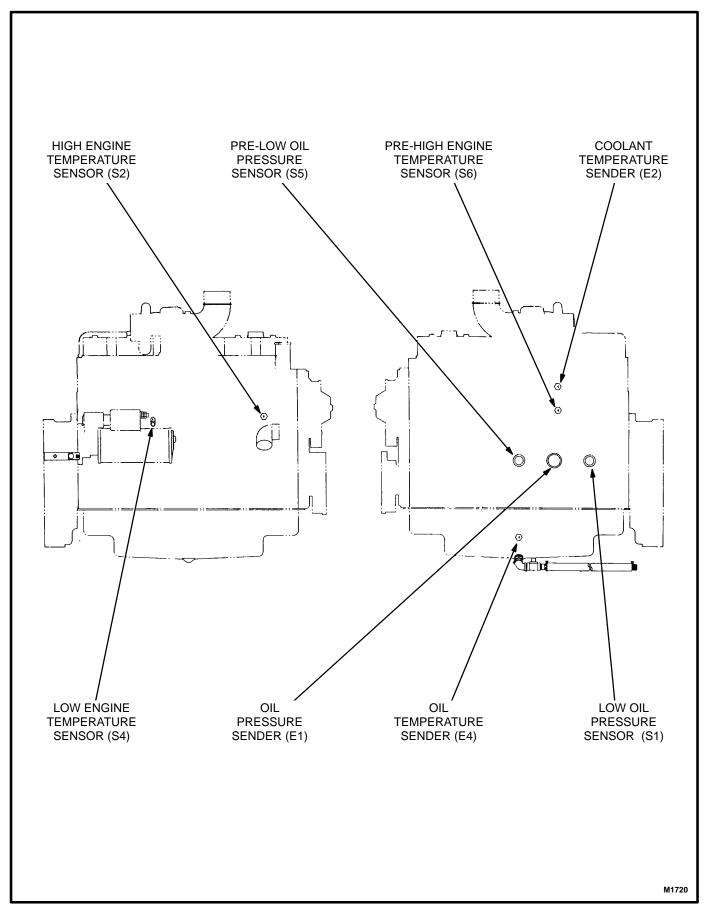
ENGINE SENSOR LOCATIONS (C-SERIES ENGINES)
